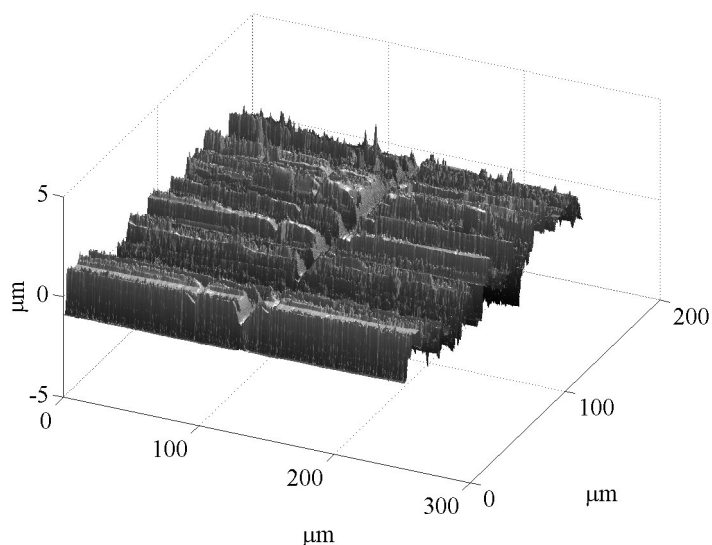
Abrasion grooves formed by a wedge shaped tool.
